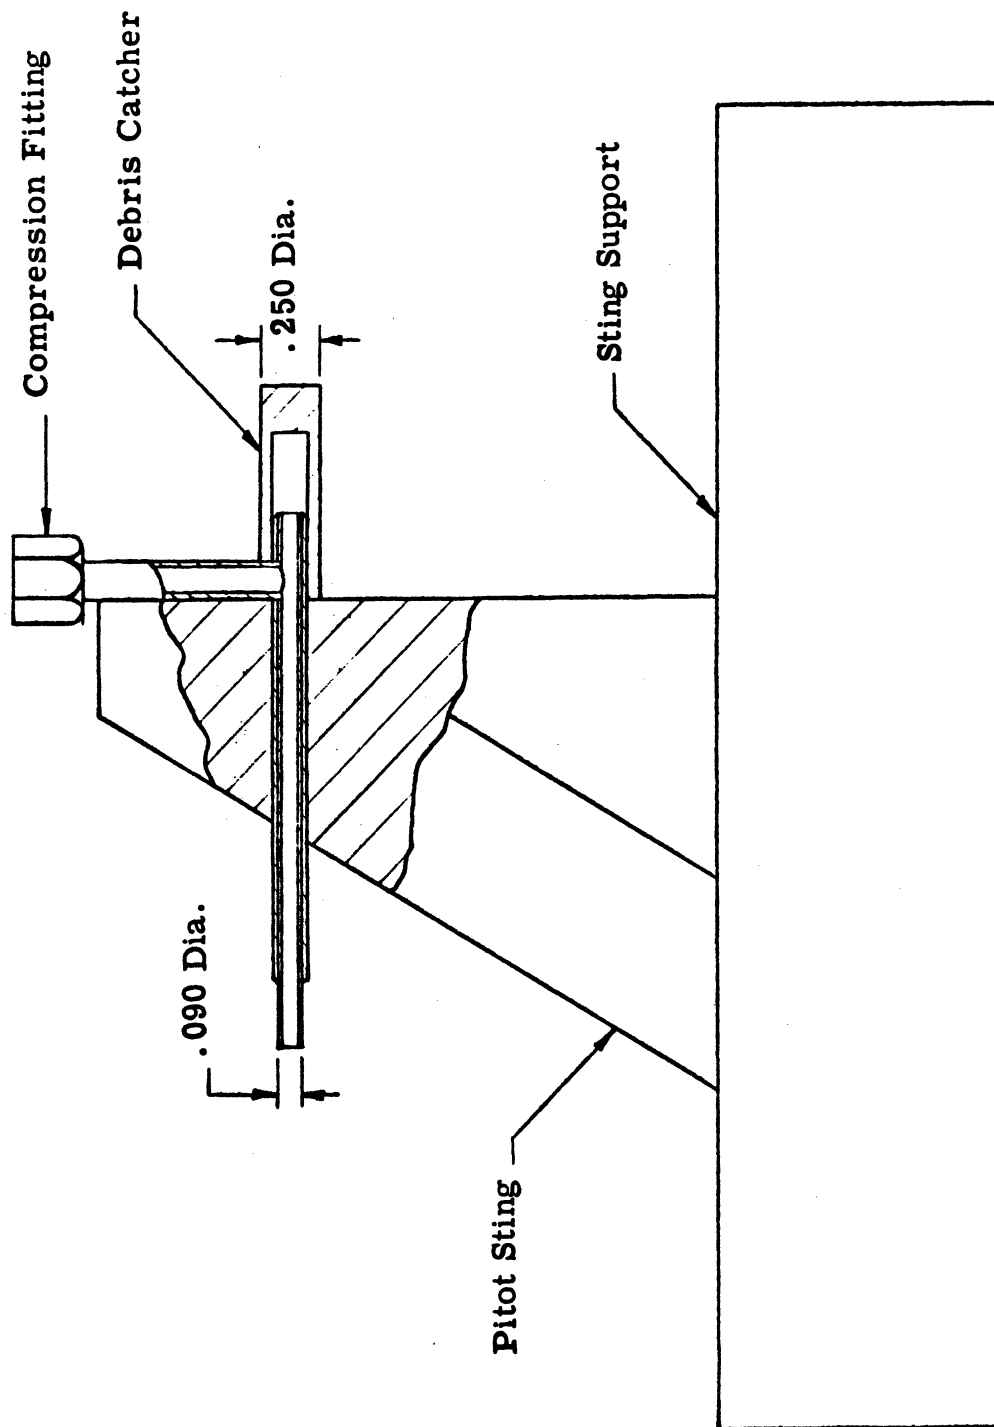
Sketch of Mach 5 Nozzle Pitot and Sting
